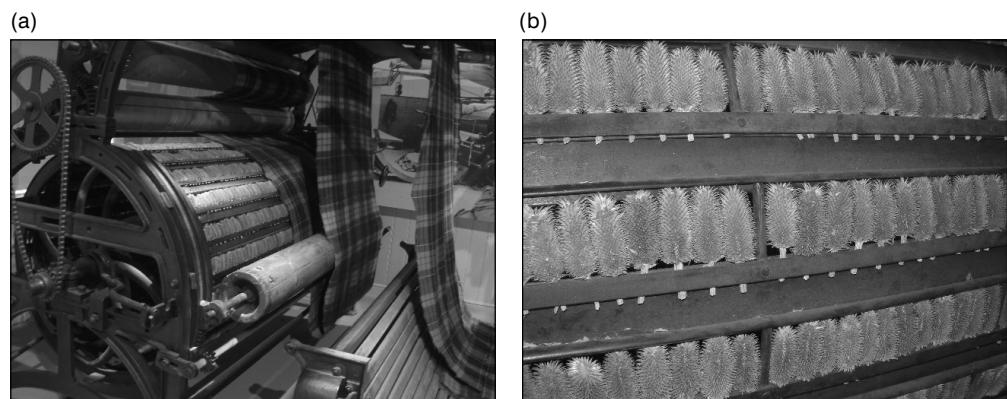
Photographs of (a) teasel raising machine and (b) mounted teasels. Machine exhibited in Geelong Wool Museum
